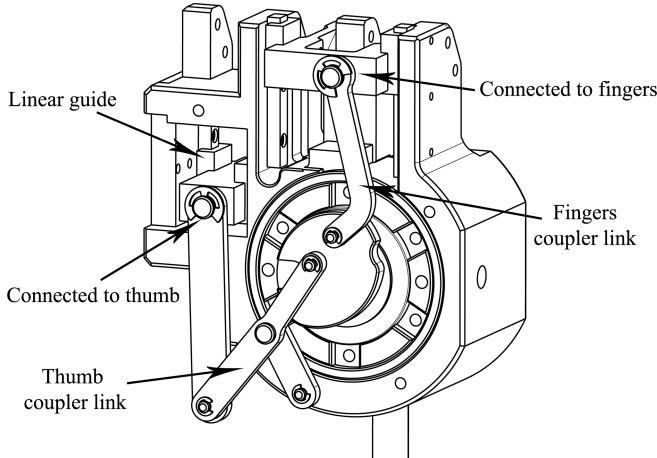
Hand mechanism connecting actuator and both fingers and thumb mechanism. Linear guide components were used to provide prismatic motion of fingers and thumb drive links.
